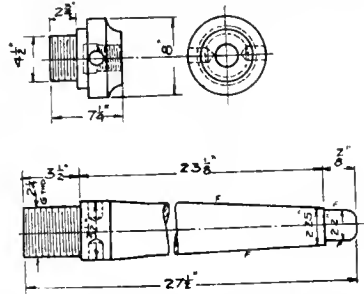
DETAILS OF PUNCH AND HOLDER IN DRAWING OPERATION.
